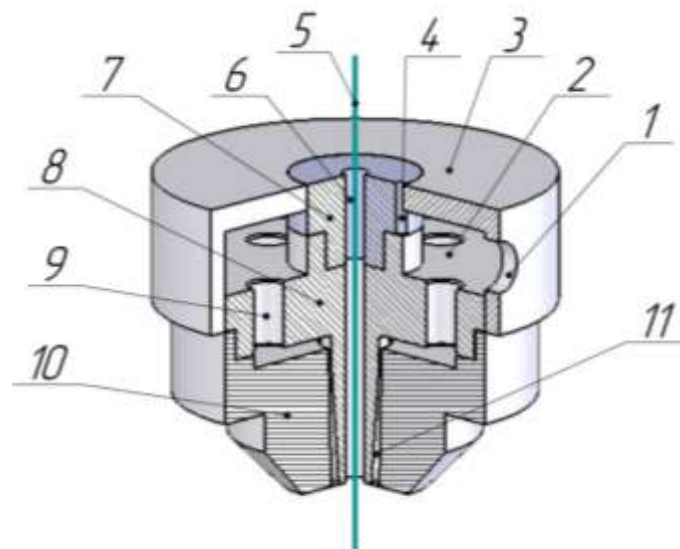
Nozzle structure diagram / *Схема пристрою сопла*: 1 – inlet port / *впускний отвір*; 2 - camera inside of the nozzle / *камера в середині сопла*; 3 - lid nozzle / *кришка сопла*; 4 - additional channel (groove) / *додатковий канал (паз)*; 5 - wire-electrode tool (WET) / *дріт-електрод інструмент (ДЕІ)*; 6 - WET delivery port / *канал подачі ДЕІ*; 7 - variable insert with groove / *змінна вставка з пазом*; 8 - internal flow conditioner / *внутрішній формувач потоку*; 9 - distributing canals of internal flow conditioner 8 / *розподільчі канали внутрішнього формувача потоку*; 10 - the outer part of the nozzle / *зовнішня частина сопла*; 11 - exit channel of nozzle / *канал виходу із сопла
